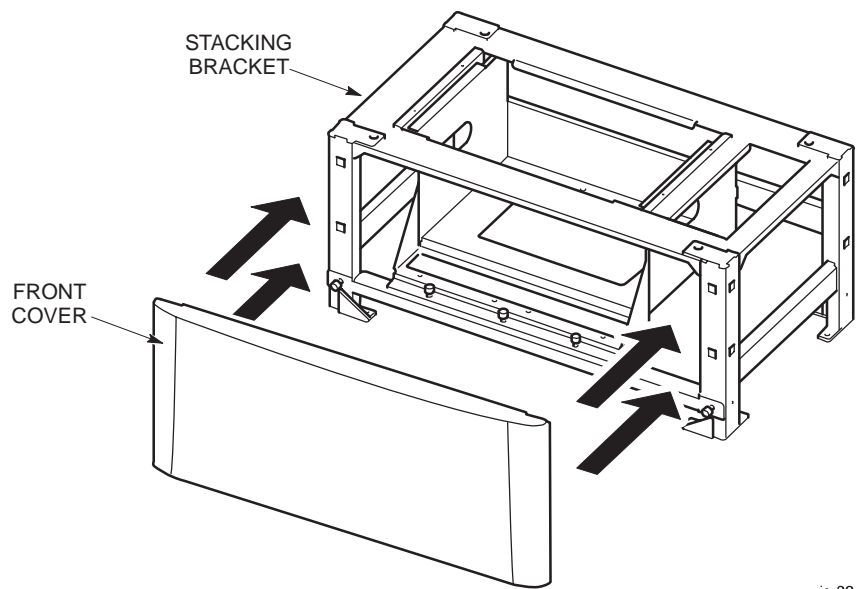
View of stacking bracket with optional CCB basket installed
